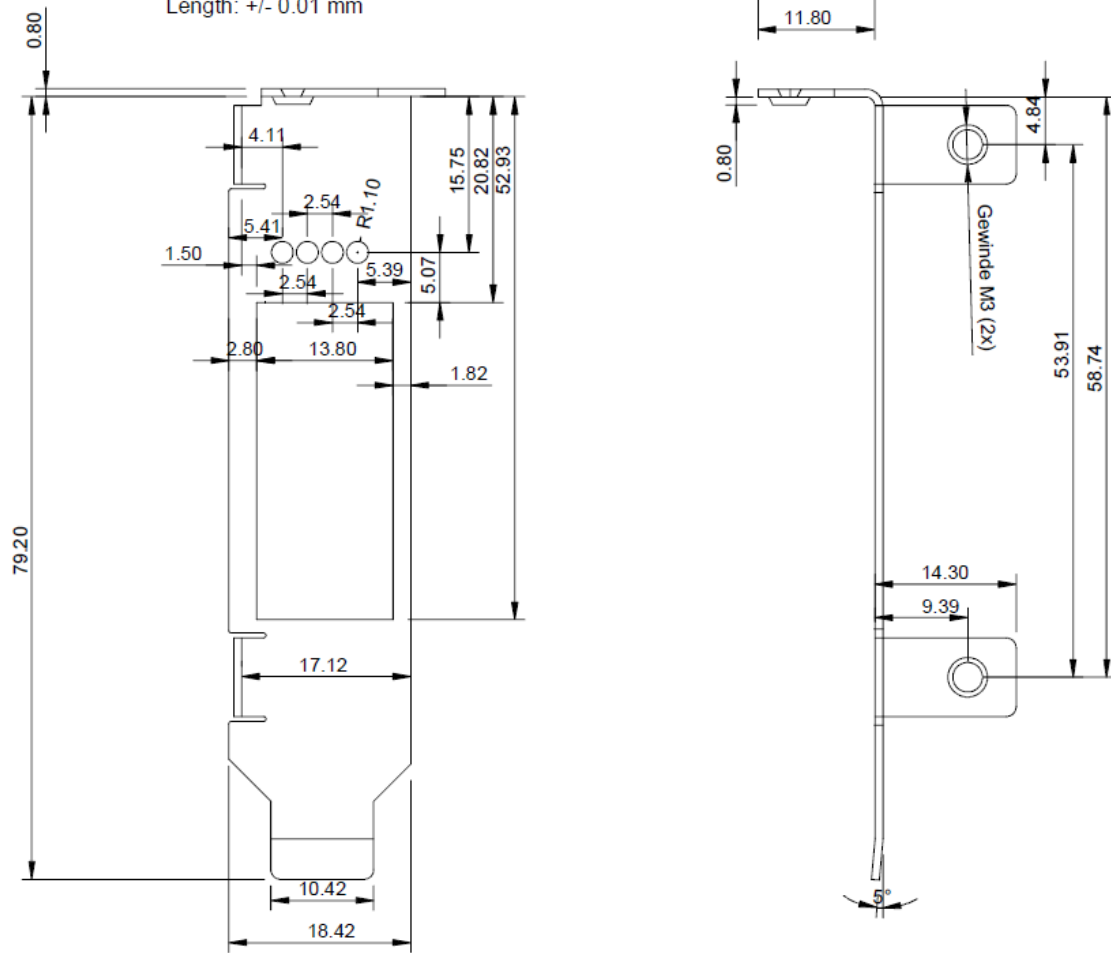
Dimensions Front Panel für CFX 70E-CO, CFX 70E-CO\MR
